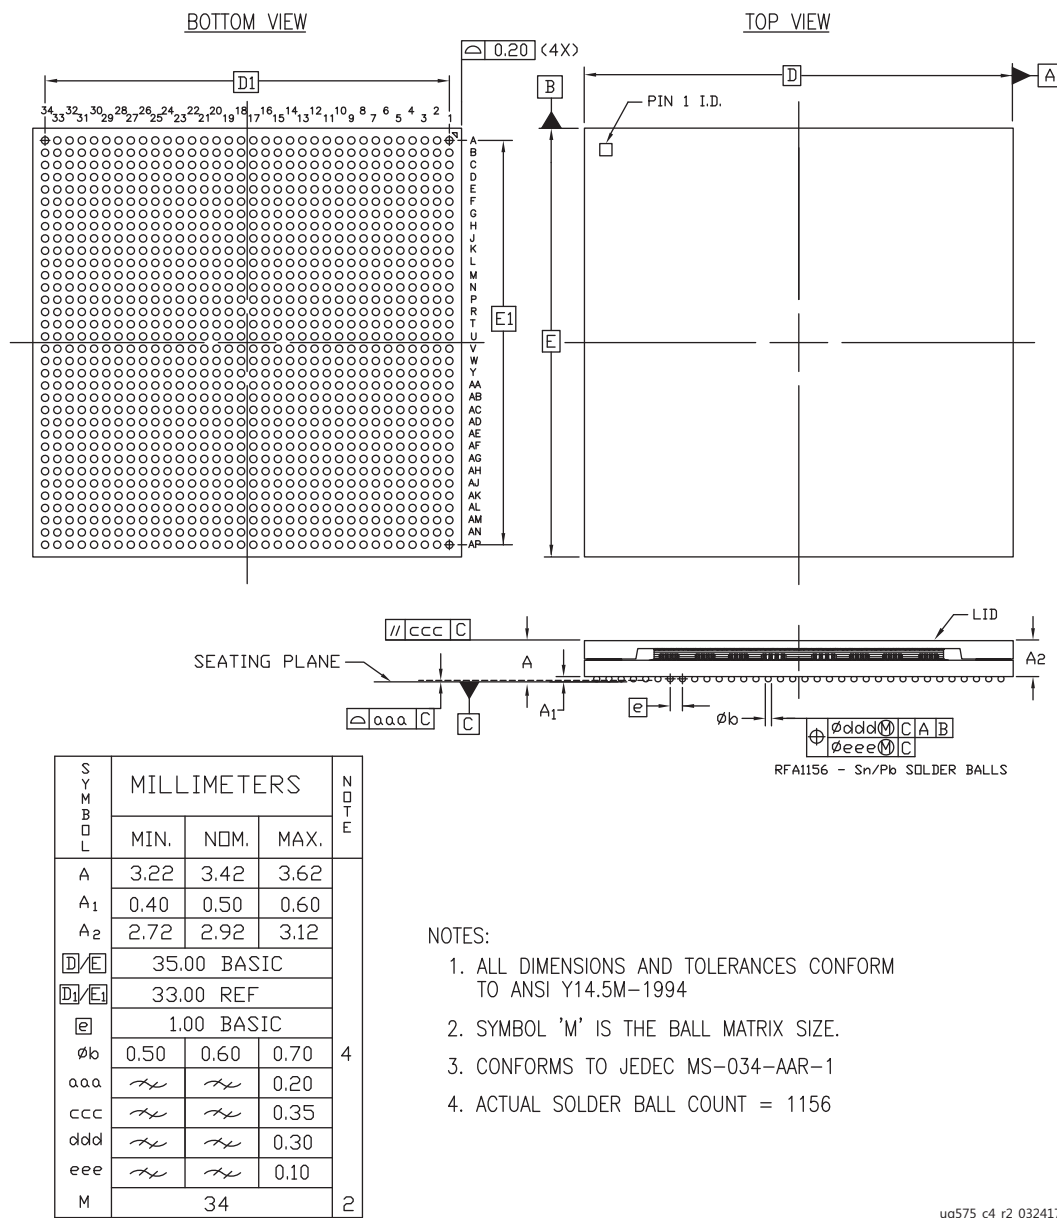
Package Dimensions for RFA1156 (XQKU040)
